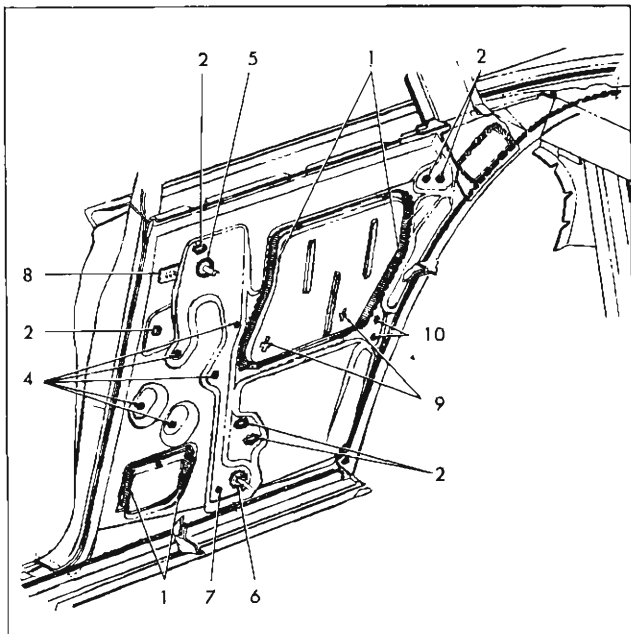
Rear Quarter Inner Panel Sealing—11 Styles—Electric
